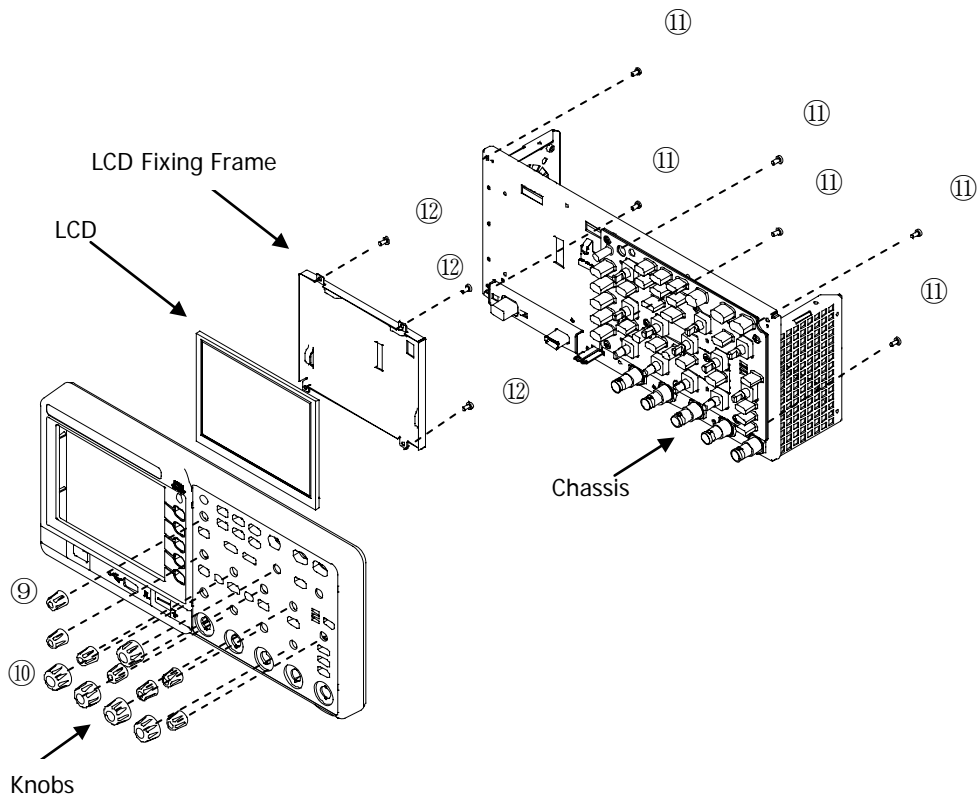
To Disassemble and Assemble the Panel and LCD
